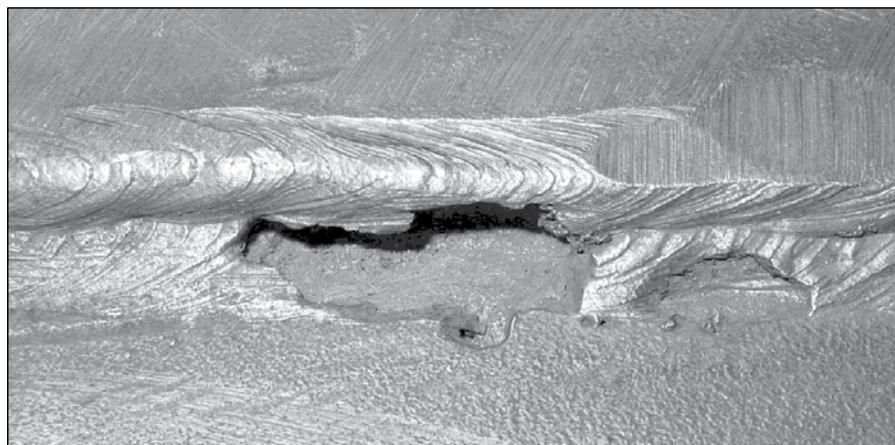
MIC attack in Type 308 weld metal (Courtesy of Chris Hayes).
